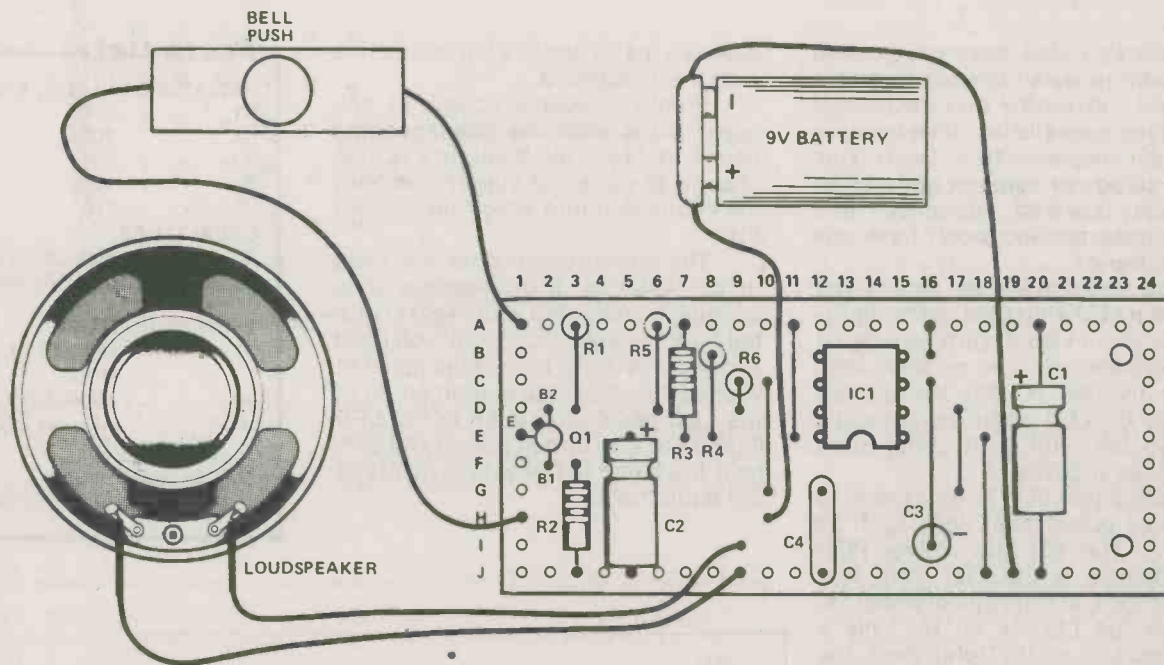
Veroboard overlay, underside track breaks and component locations, and connection details.
